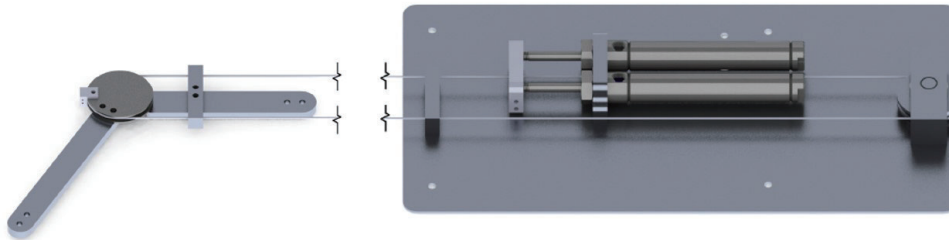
CAD design of an arm and a backplate sub-assembly of the APEX- α [74].
